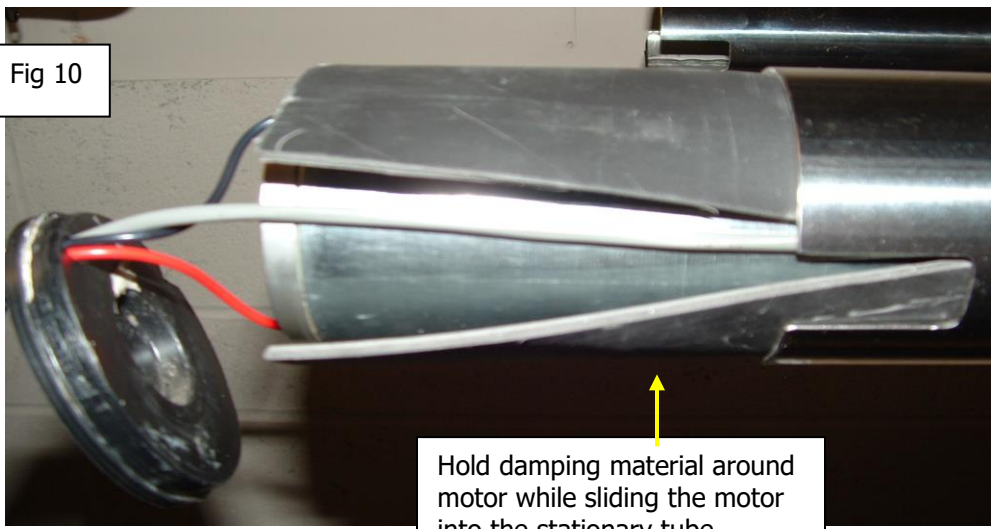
Wrap damping material around motor. Slide the motor assembly with the damping material around the motor into the actuator tube until motor is engaged with the lead screw and mounting holes line up with thru holes.
